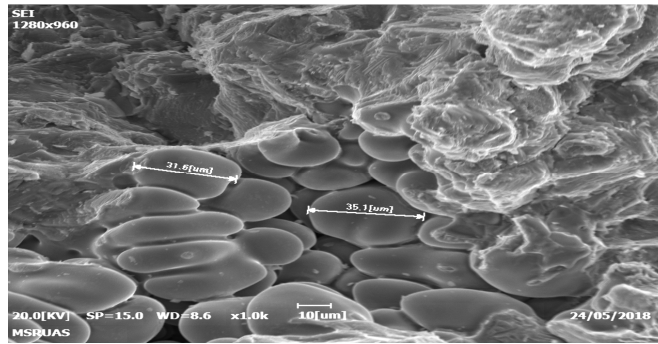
(b): Fractographs of the Tensile Specimen Shows Non-Fractured Reinforcement from the Specimen
